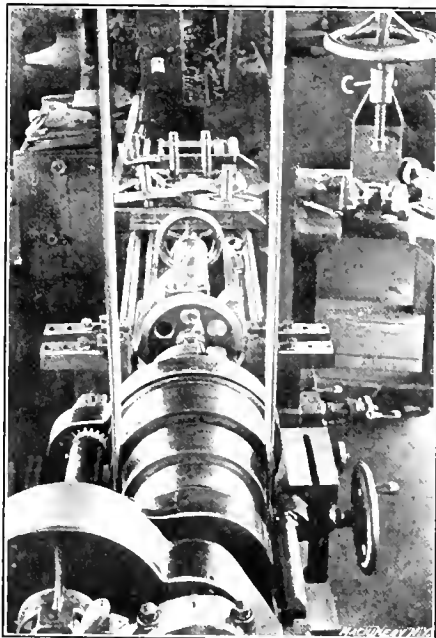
View of Lathe especially fitted for Turning Gear Blanks
